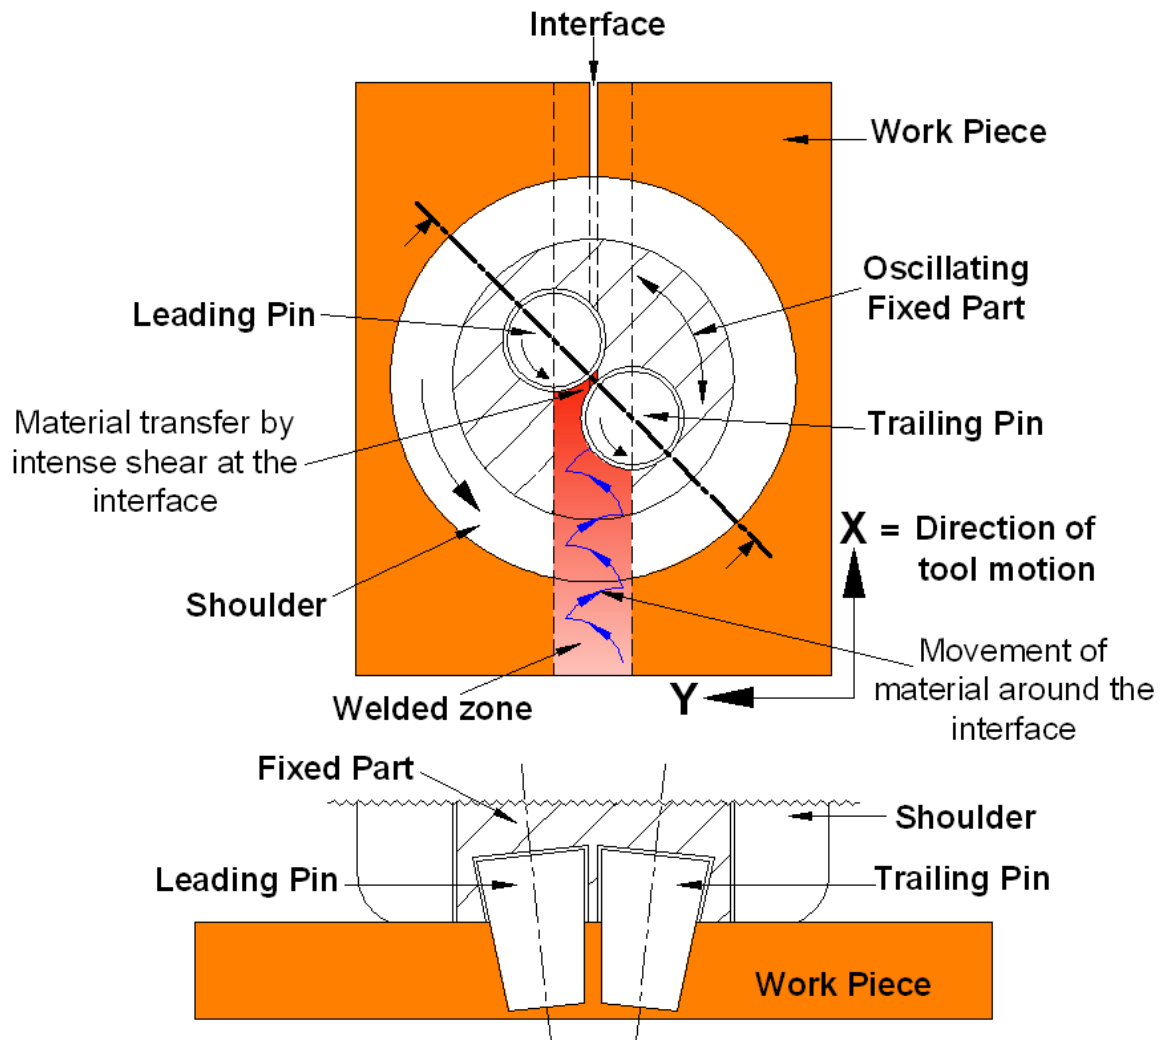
Schematic of the concept of two-pin friction driven stitch welding according to [5]. The bottom view is the rotated sectional view along the plane shown in the top view.
